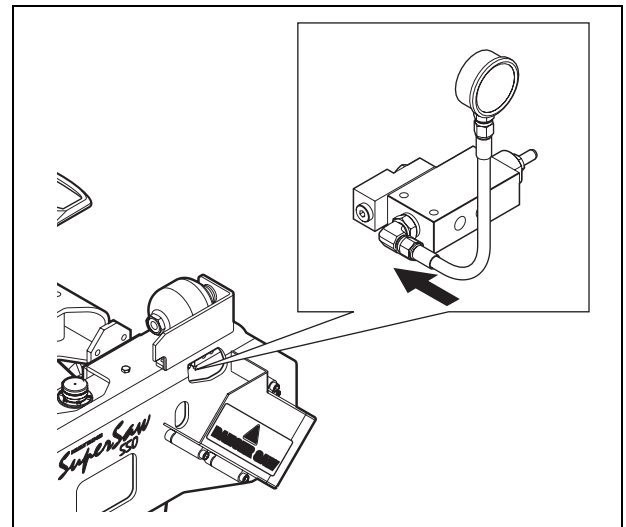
Connect a pressure gauge to the pressure regulating valve
